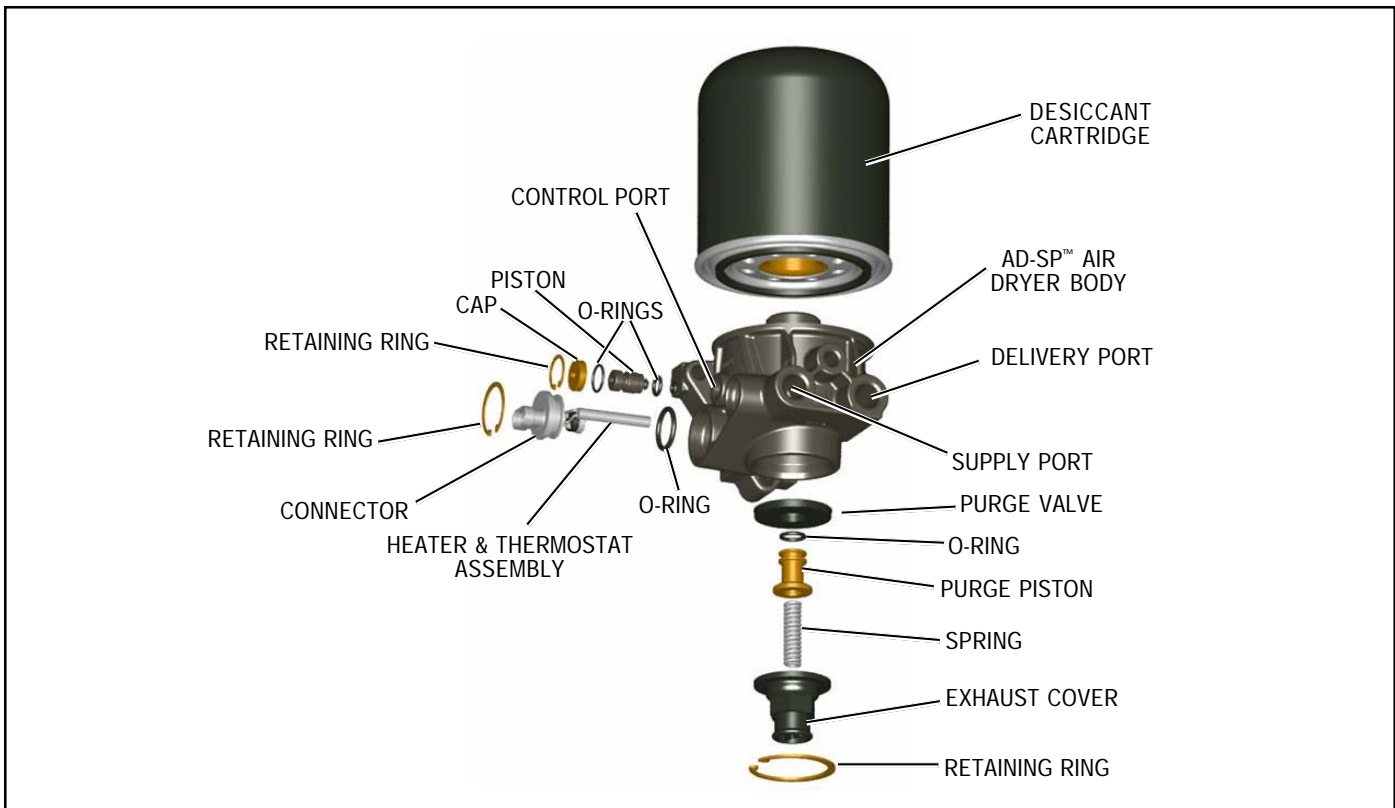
AD-SP™ SYSTEM PURGE AIR DRYER EXPLODED VIEW
